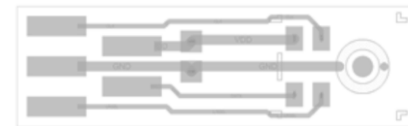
EV\_ICS-40618-FX/ICS-40638 Board Layout (Top View)
